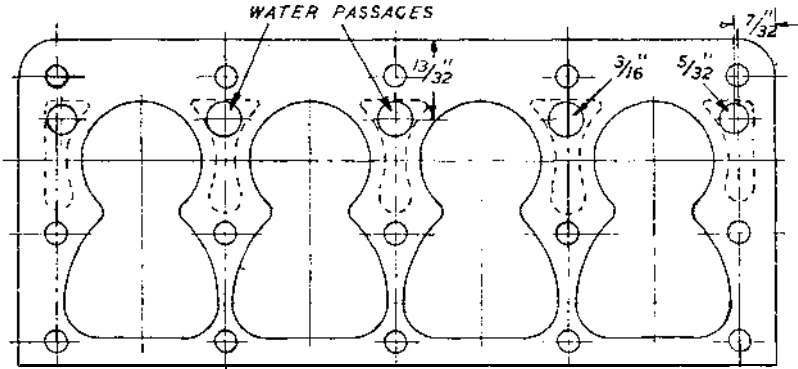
Plan, of cylinder-head joint surface, showing position of water communication holes. Dotted lines indicate how holes may be enlarged to suit thermo-syphon circulation
